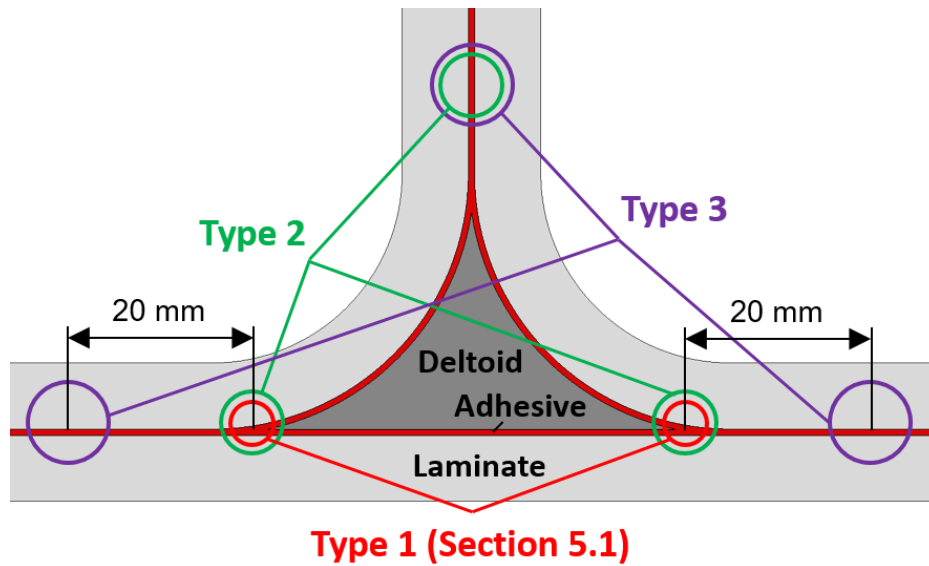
Arrester position of specimens used in tensile tests in section 5.2.
